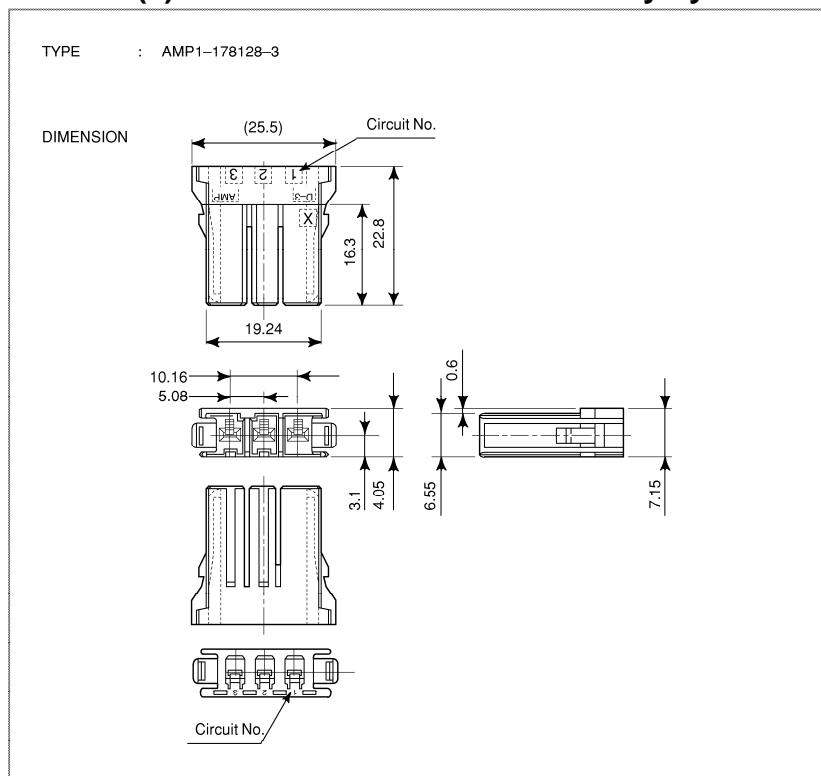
(b) Connector (2) for servo side manufactured by Tyco Electronics
